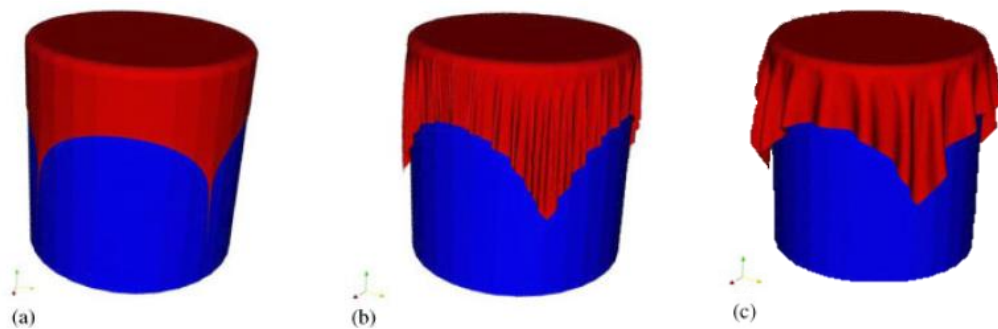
Draping on a cylinder considering a) tensile stiffness, b) tensile and in-plane shear stiffness, and c) tensile, in-plane shear and bending stiffness [42].
